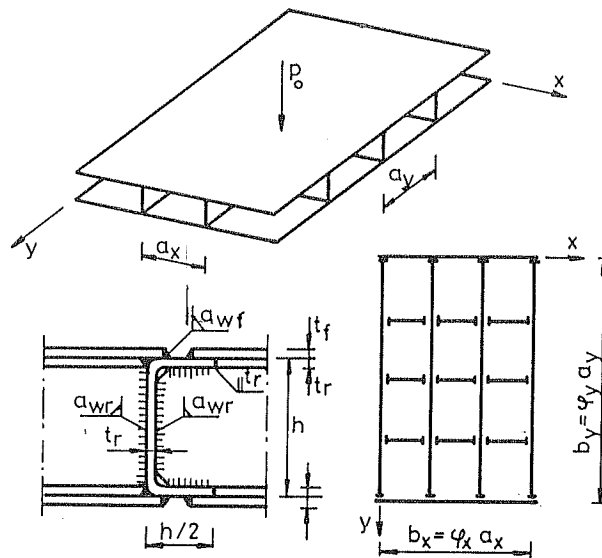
Details of a welded rectangular cellular plate
